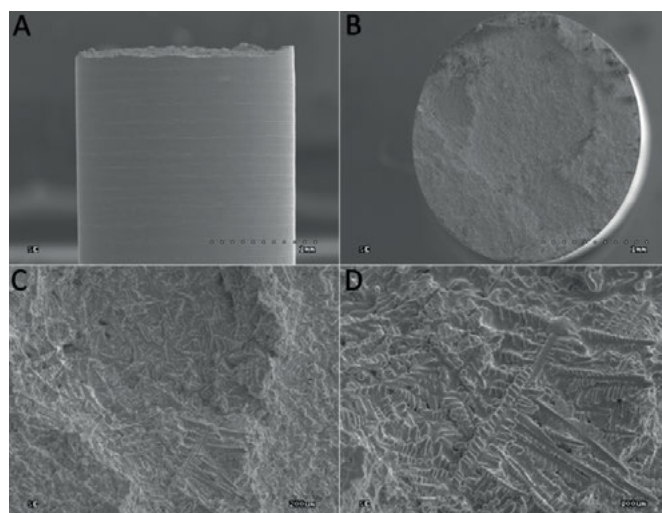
Microscopic images of fractures of gas-welded samples. A - General view of the sample, B - General view of the fracture, C - The fracture area in the dendrite zone, D - Magnified fracture in the dendrite zone
